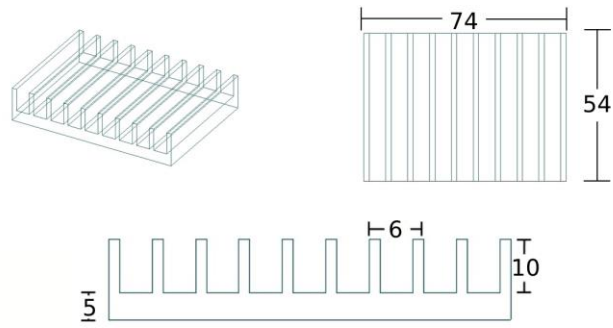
Geometry and dimensions of the finned copper heat sink used in the optimized configuration.
